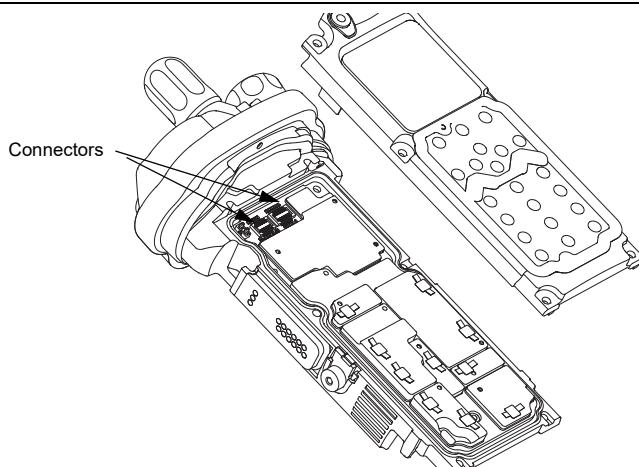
Remove Back Chassis Assembly from Main Chassis Assembly
